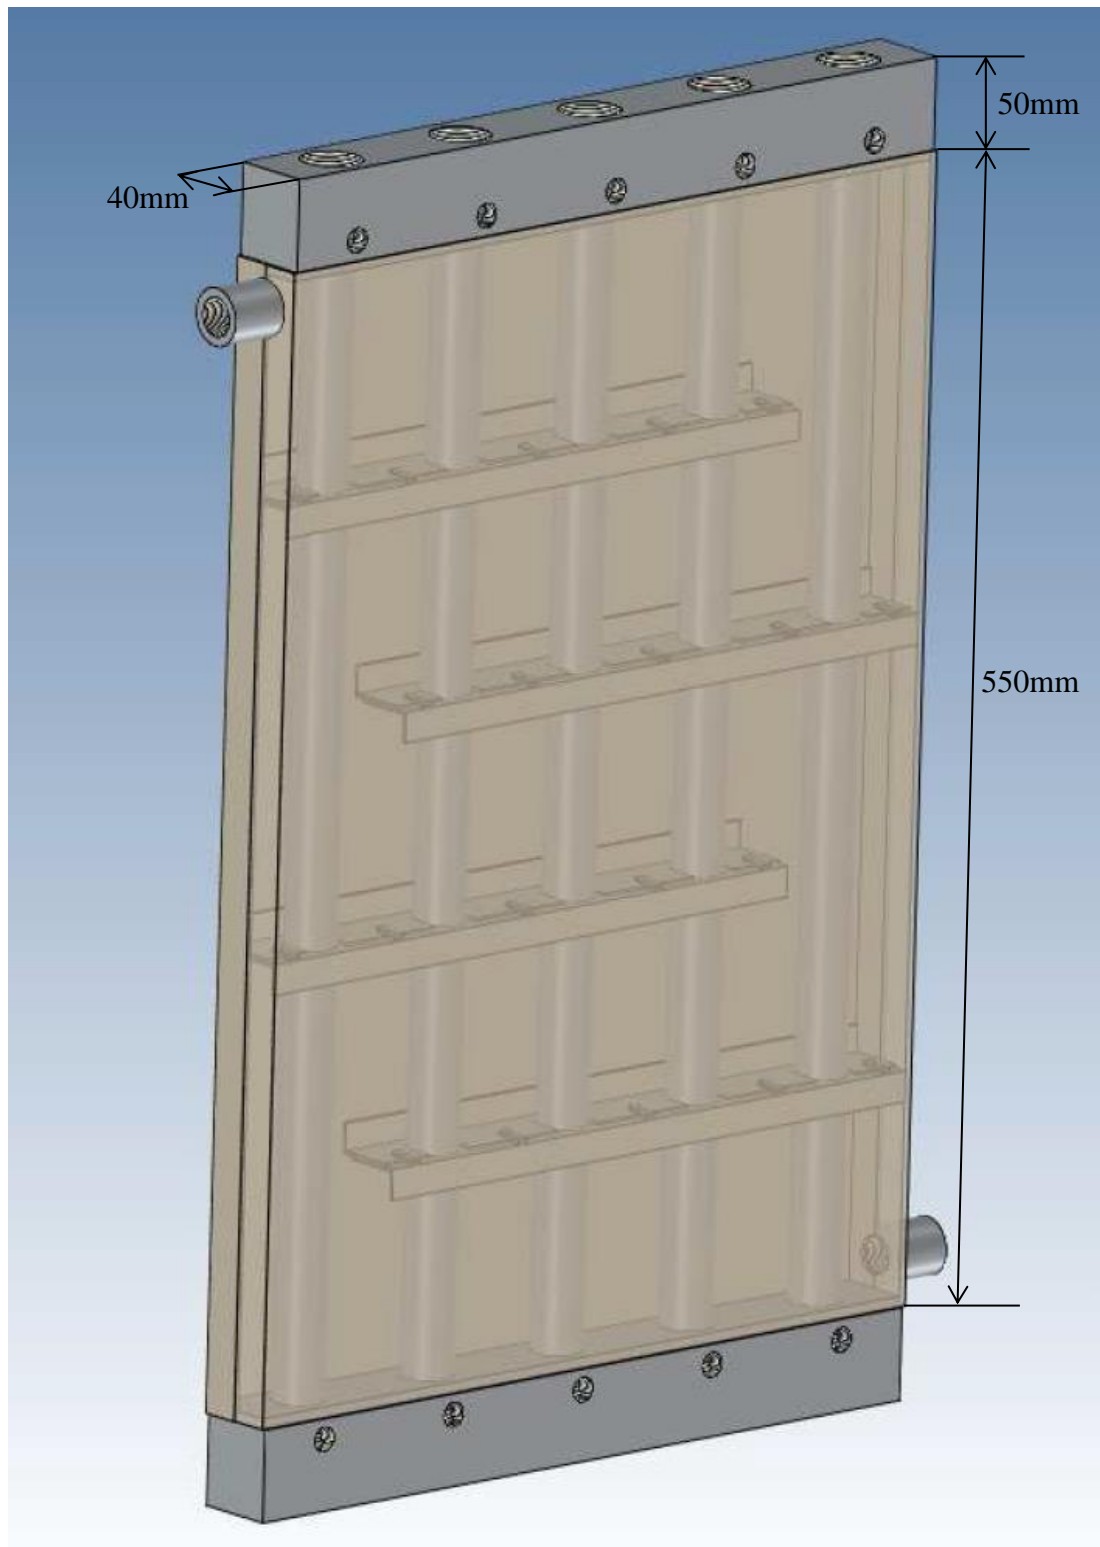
CAD drawing of multiple channel reactor, courtesy of S&C Thermofluids.
